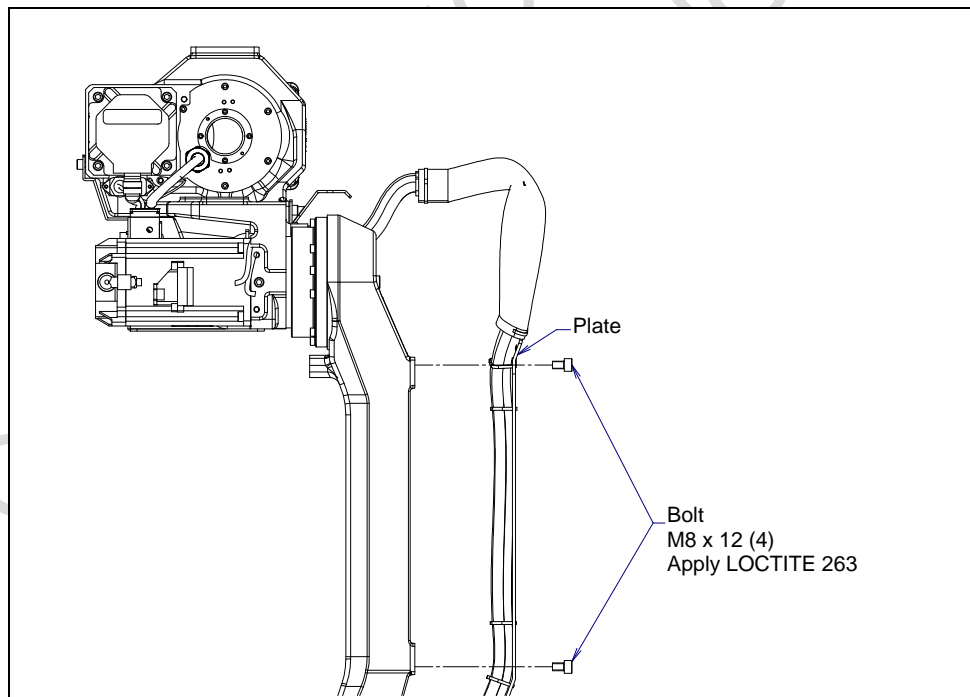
(l) Replacing cable kit (J2 arm part)
